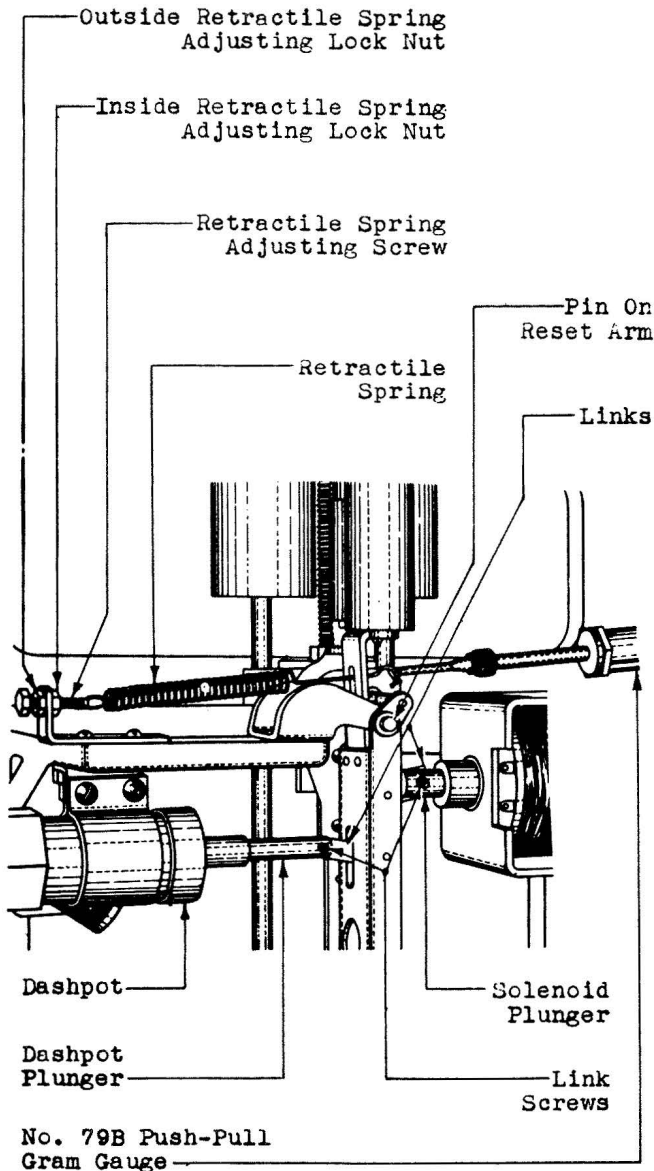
Method of Checking Tension of Retractable Spring With No. 79B Push-Pull Gram Gauge
